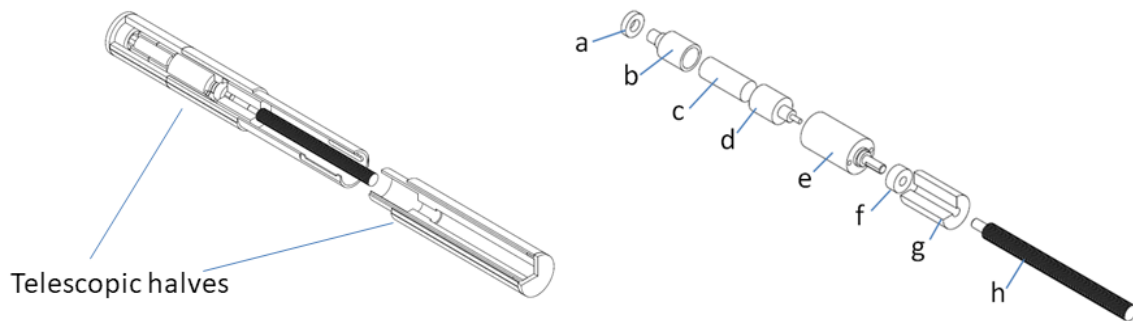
Exploded view of the internal components of the lengthening plate: a) radial bearing; b) proximal magnet housing; c) magnet; d) distal magnet housing; e) gearbox; f) thrust bearing; g) flexible coupling; h) leadscrew.
